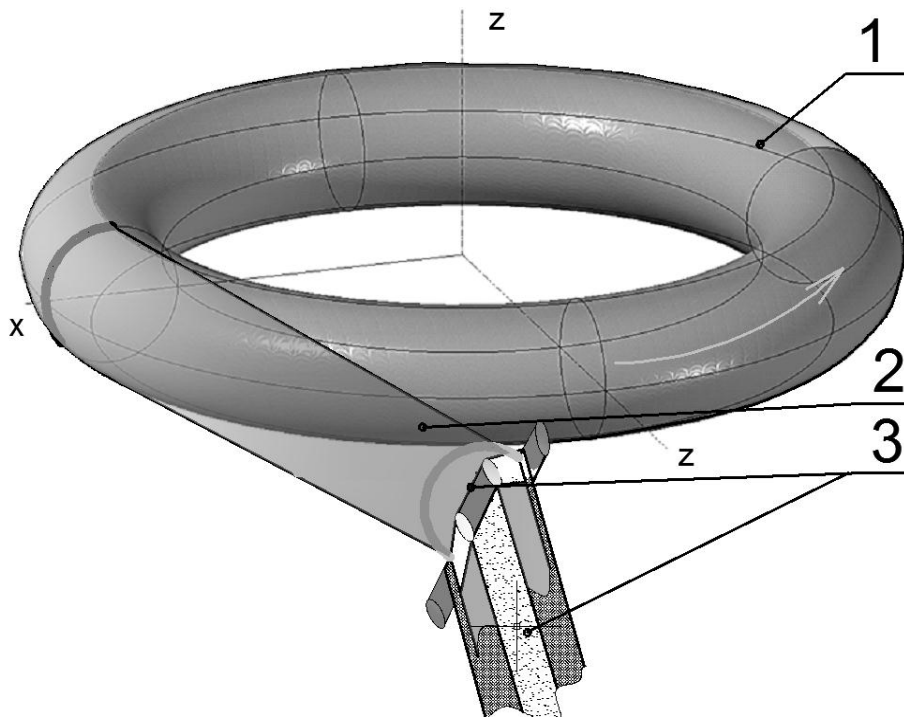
Laying polymer tape on the outer surface mandrel in the shape of a torus: 1 - mandrel; 2 - polymer tape; 3 - filer system with guide rollers.
